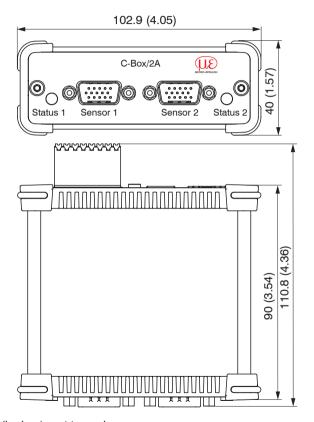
Dimensions C-Box/2A, dimensions in mm (inches), not to scale
